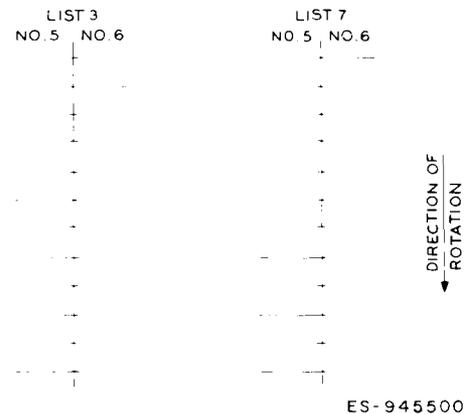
Position of Bumpers on Bumper Wheels Involved in Converting KS-5546 L3 to L4 (Old Design)
